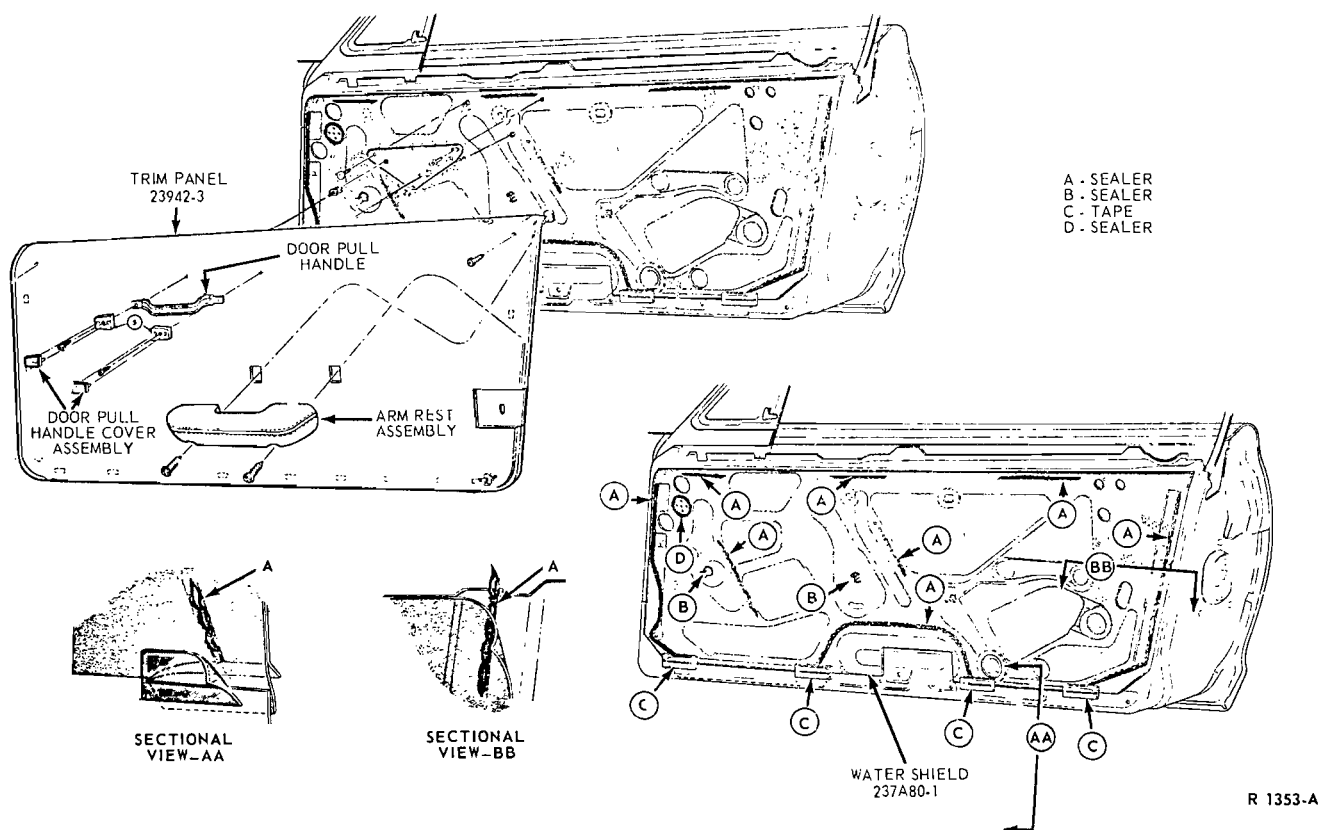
Typical Door Trim Panel and Water Shield Installation—Cougar
